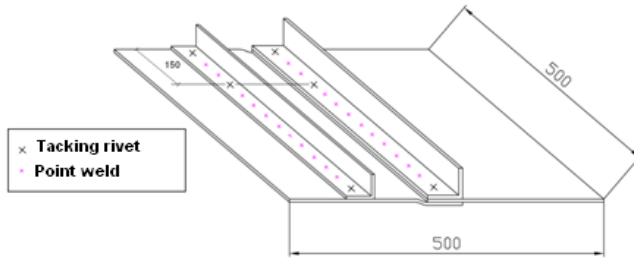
Drawing of the test specimen - L-410 UVP-E fuselage panel (dimensions in millimeters).
